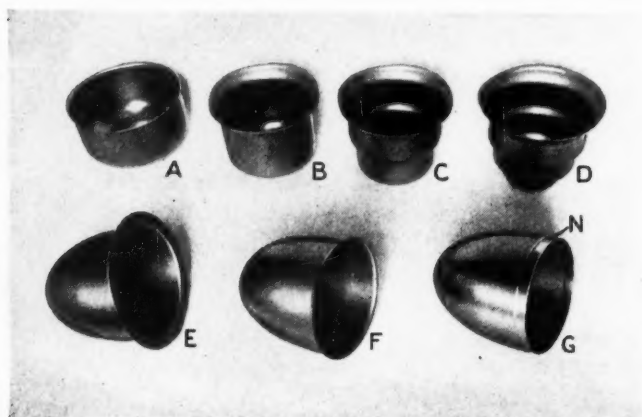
Successive Steps in Forming Bullet-shaped Rear Part of Lamp Shown in Fig. 1
